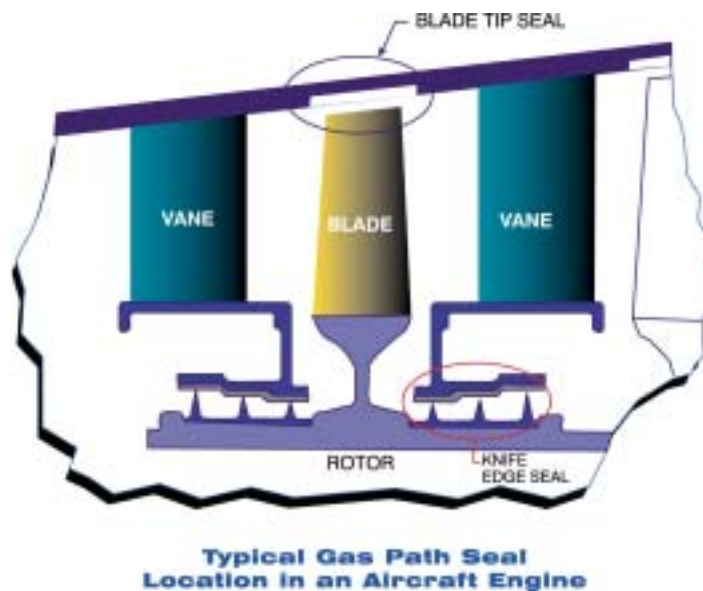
Typical locations of abrasible blade tip and shaft knife edge seals in the compressor section of a jet engine gas turbine.
